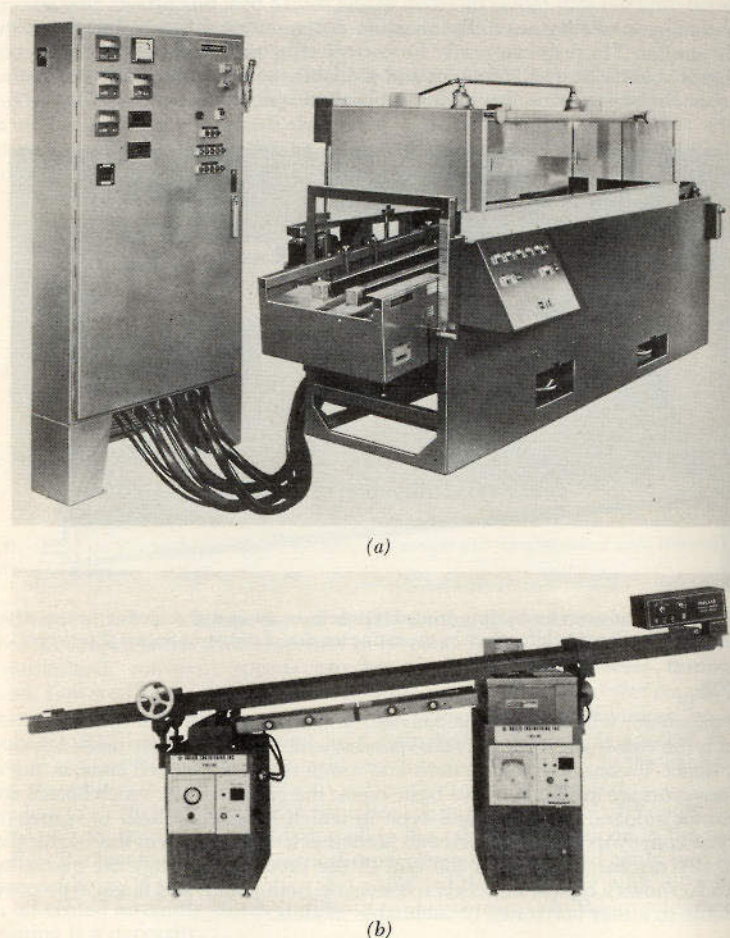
Typical automated solder systems. (Courtesy (a) Electrovert, Inc. and (b) Hollis Engineering.)
